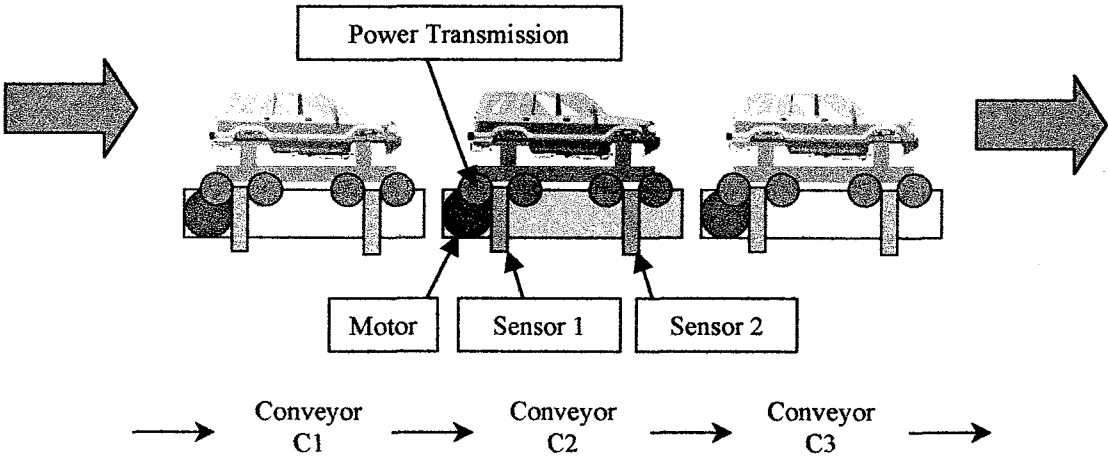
Power Roll Bed conveyor in a manufacturing line
